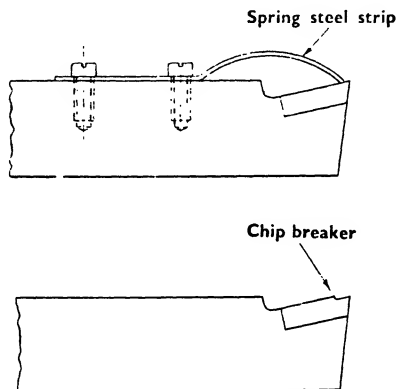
CHIP BREAKERS ON CEMENTED CARBIDE TOOLS
